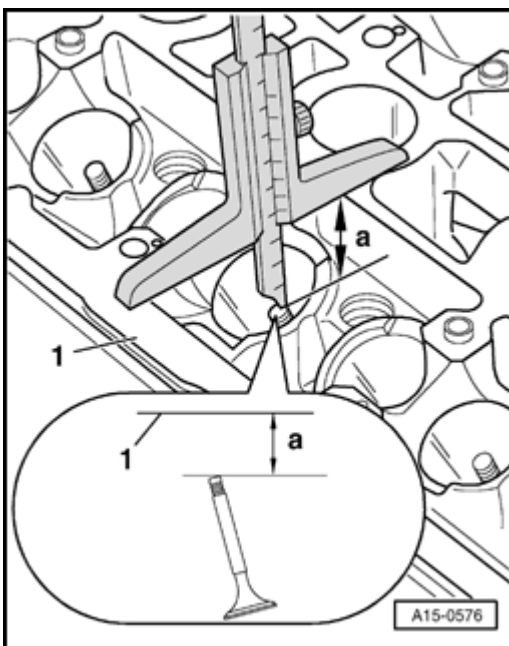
Measuring Distance Between Valve Stem End (Upper Edge) And Top Surface Of Cylinder Head Using Depth Gauge
